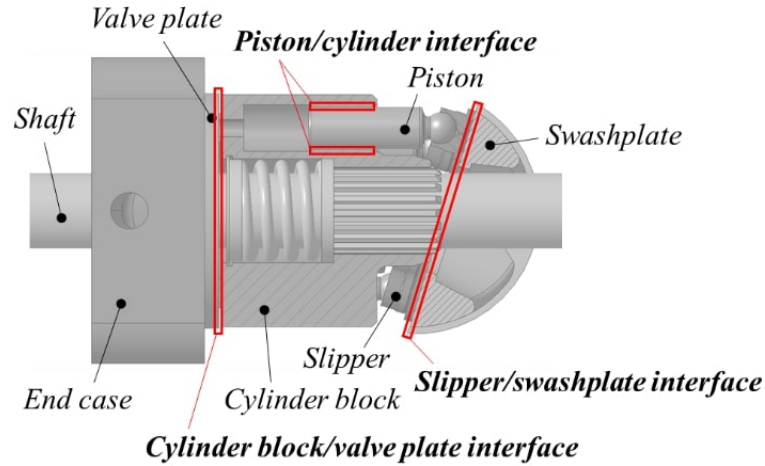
Three lubricating interfaces in swashplate type axial piston machines.
